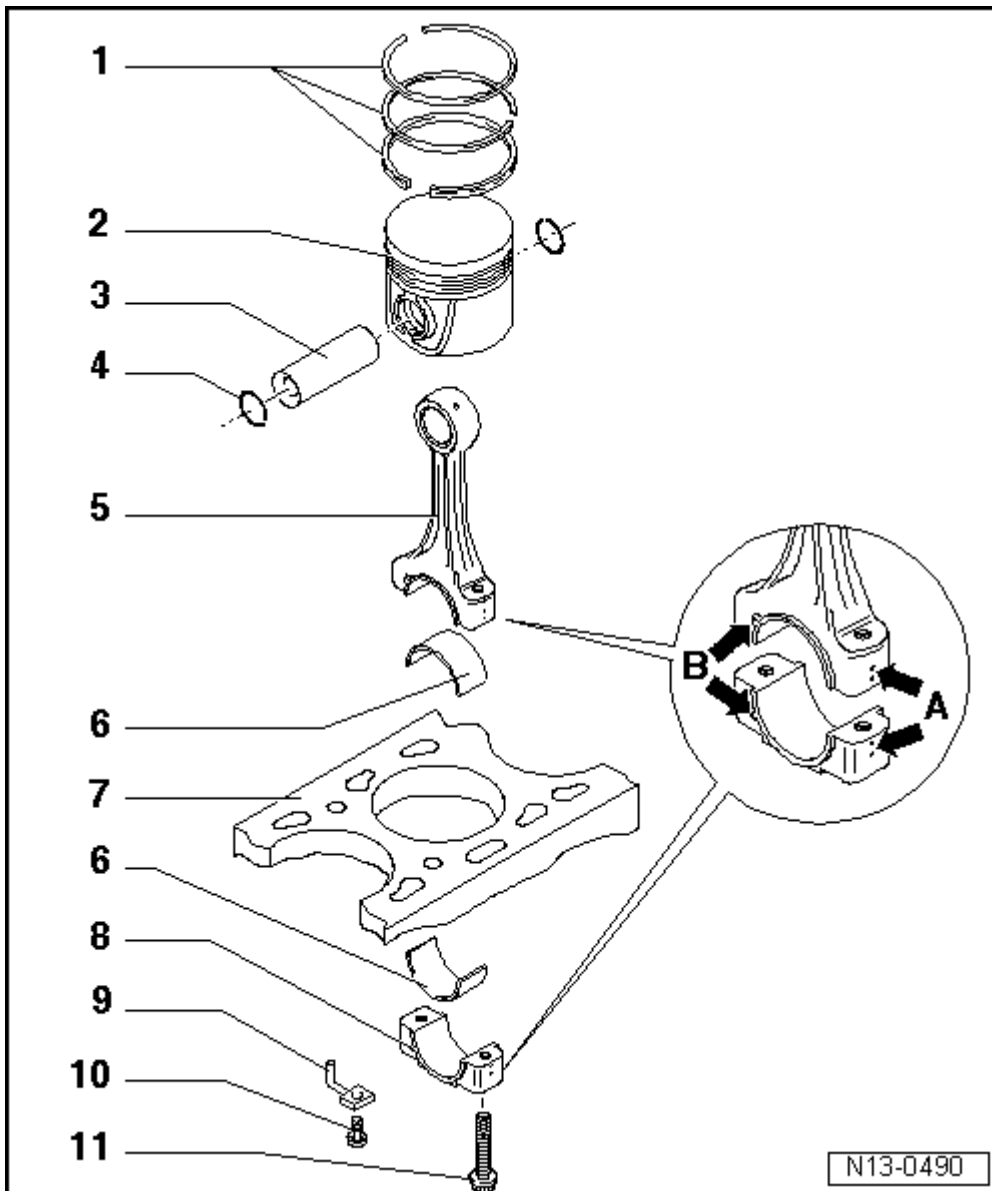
Identifying Pistons And Connecting Rod Assembly Overview
